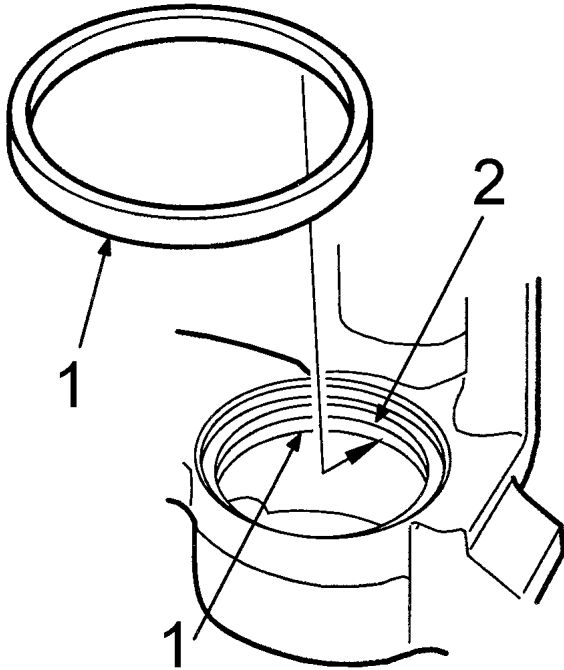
Install Caliper Piston Seal into Caliper Piston Bore Groove
